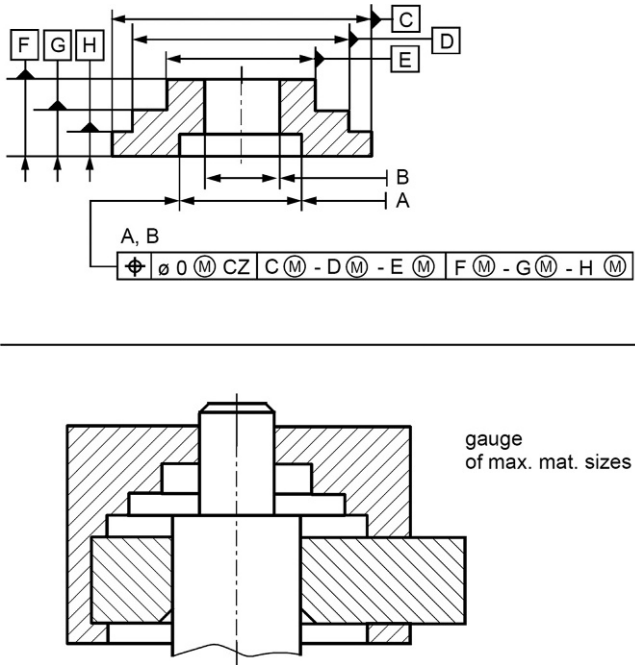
Tolerancing of a bush with everywhere clearance fits
